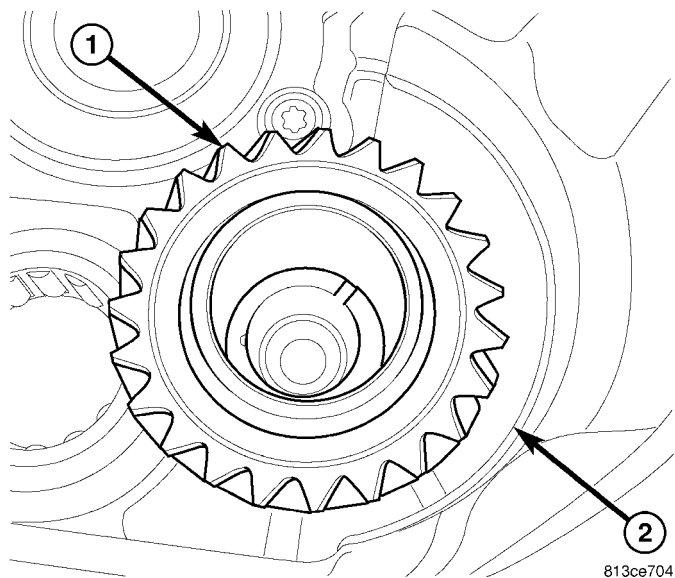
REAR HOUSING MAINSHAFT BEARING
